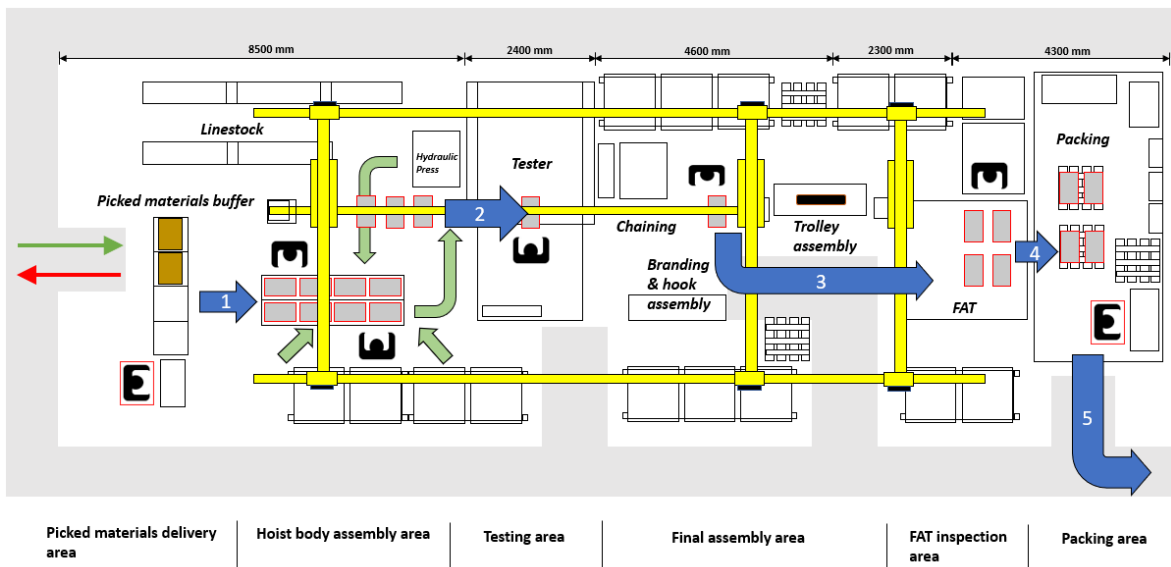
Blank paper scenario #1 assembly area layout (Factory body set)
